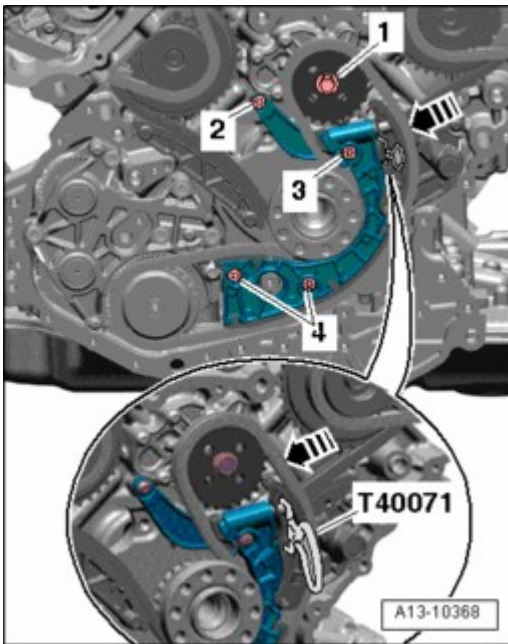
Pressing Tensioning Rail, Securing Chain Tensioner With Locking Pin T40071, Removing Bolts, Balance Shaft Chain Sprocket & Chain Tensioner
